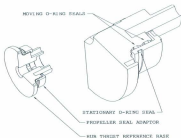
O-ring seal arrangement for hub thrust reference base.
